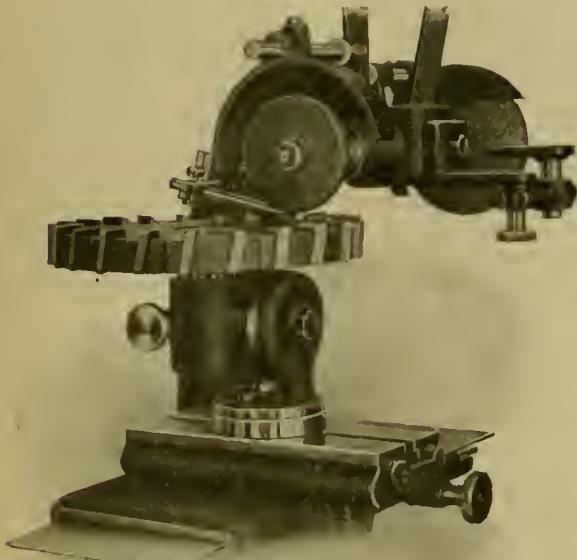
SHARPENING INSERTED TOOTH FACE MILL.
